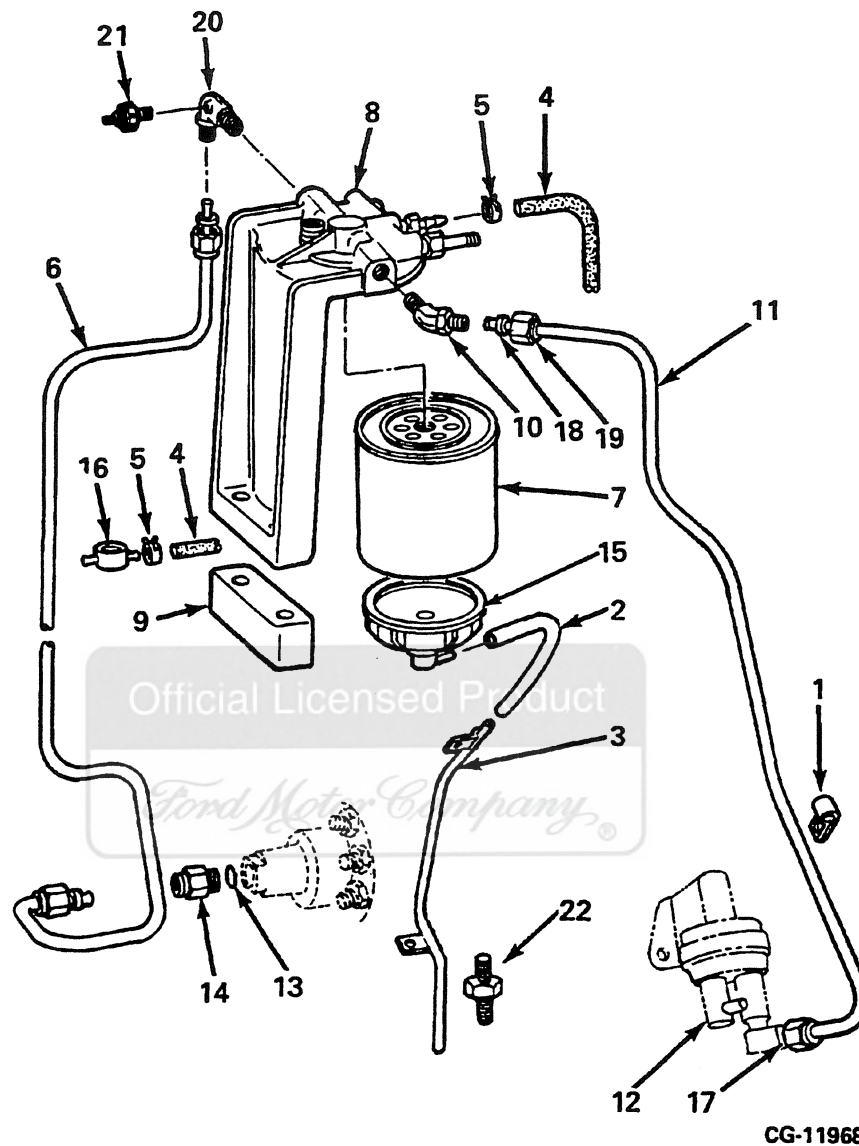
A. Fuel Filter and Supply Pump Assembly
